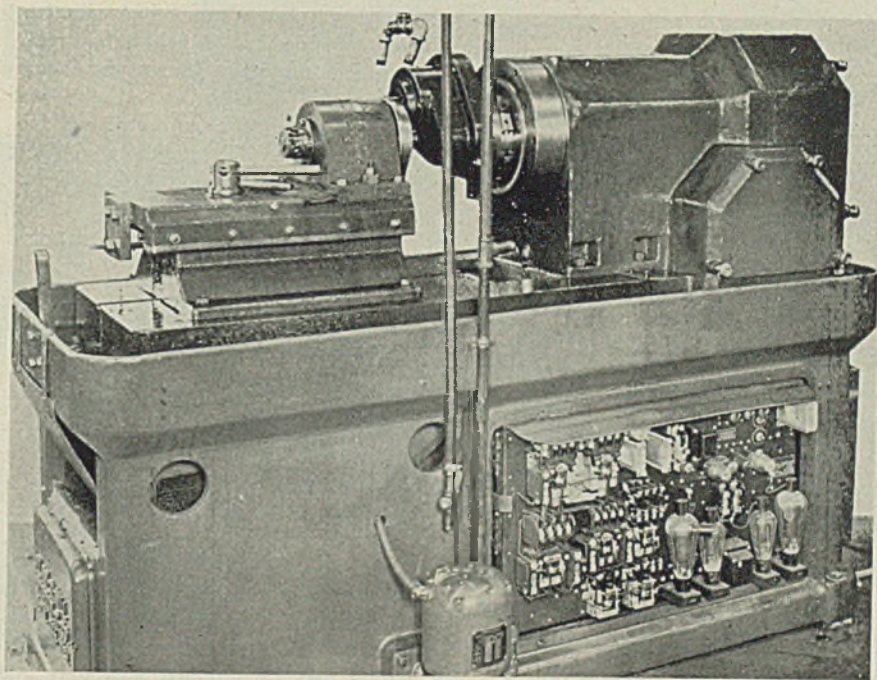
(Below)—Form and thread milling machine equipped with the control
